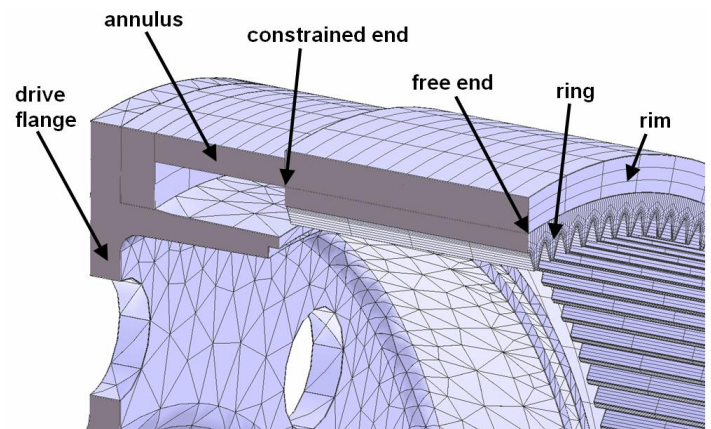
CUTAWAY VIEW OF THE FINITE ELEMENT MODEL OF THE STAGE 2 RING GEAR, DRIVE FLANGE, AND ANNULUS.
